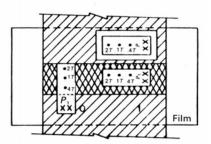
Side and Top Views of Hole-Type IQI Placements
